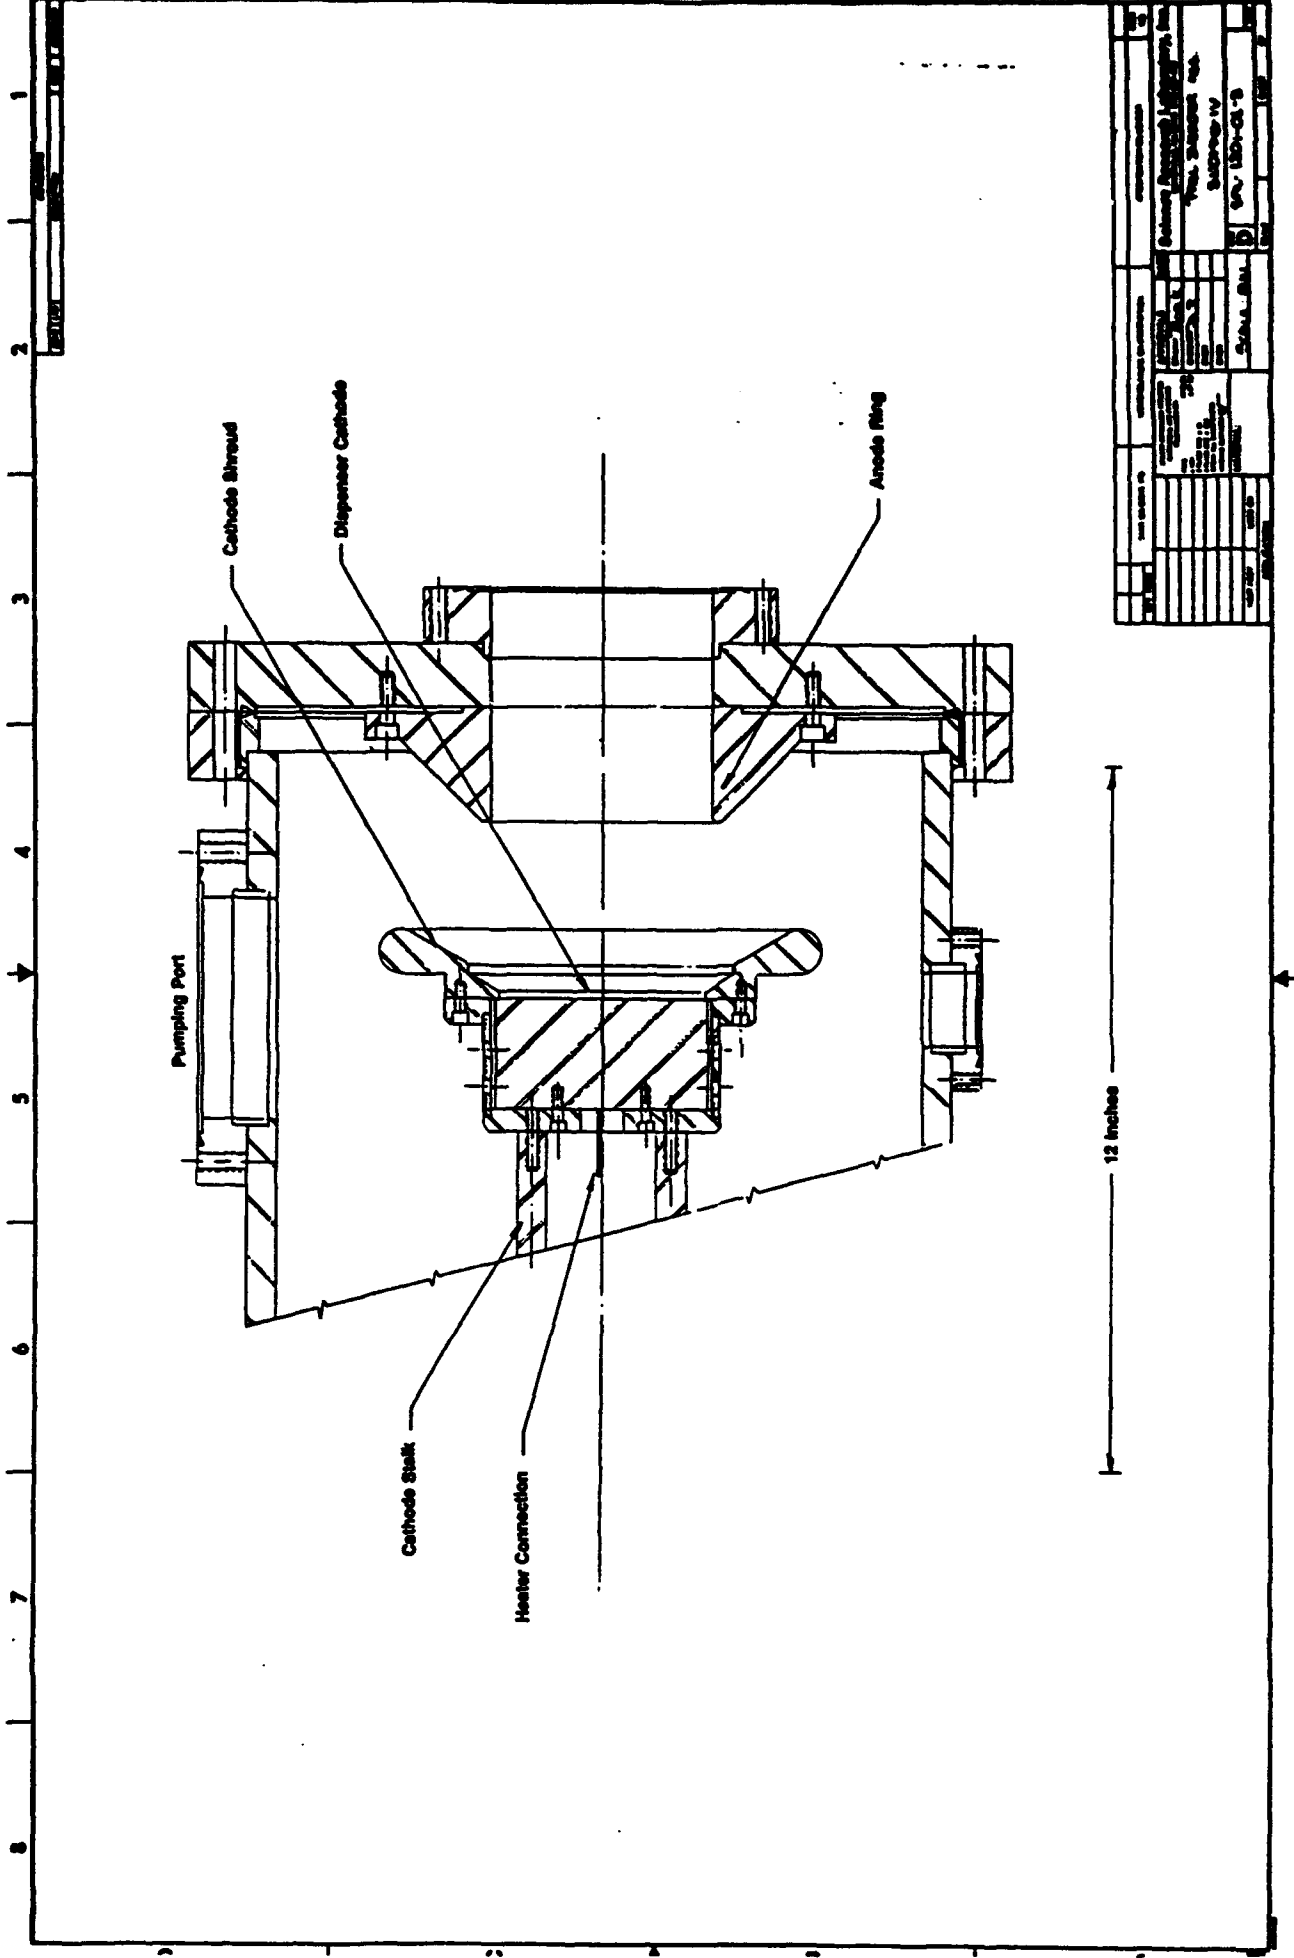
Preliminary assembly drawing of cathode extraction optics and vacuum pumping port.
